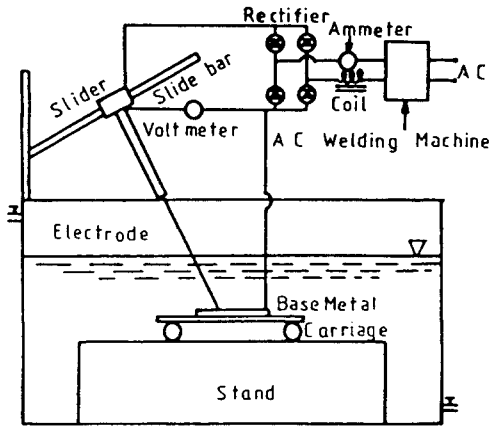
Block diagram of experimental underwater welding apparatus (gravity type)
